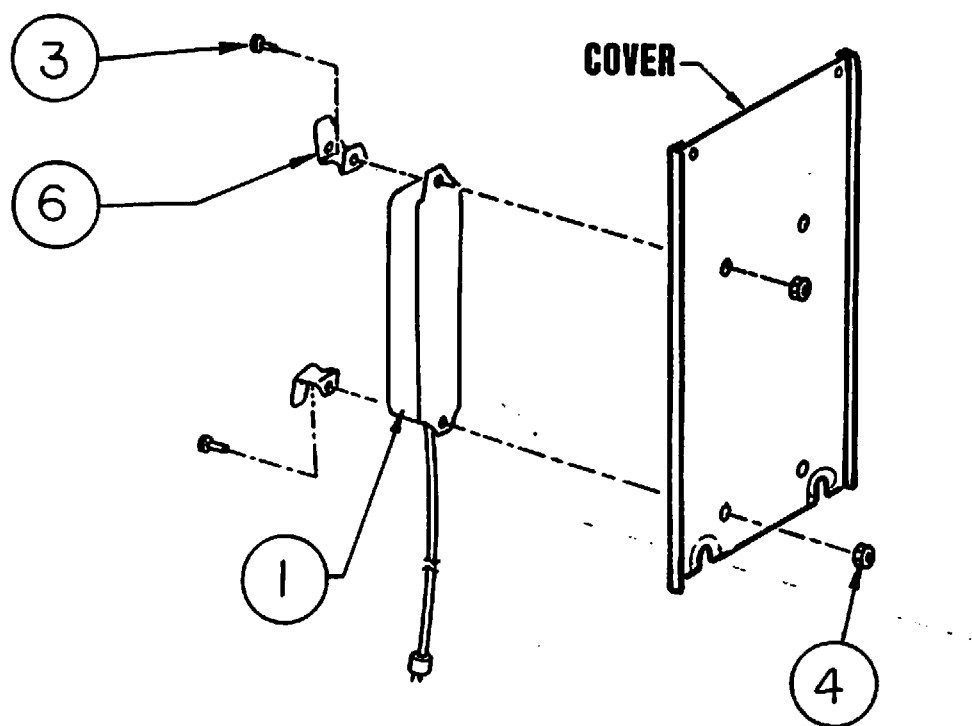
AC RECPTACLE BOX ASSEMBLY, PARTS LOCATION DIAGRAM
